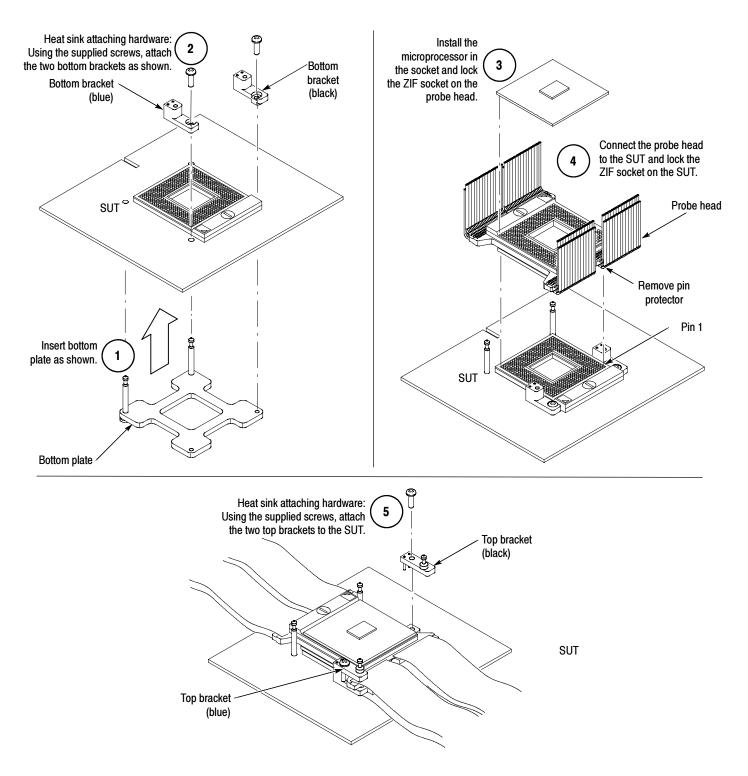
Probe head installation using Chipcool 1 & 2 heat sink hardware
